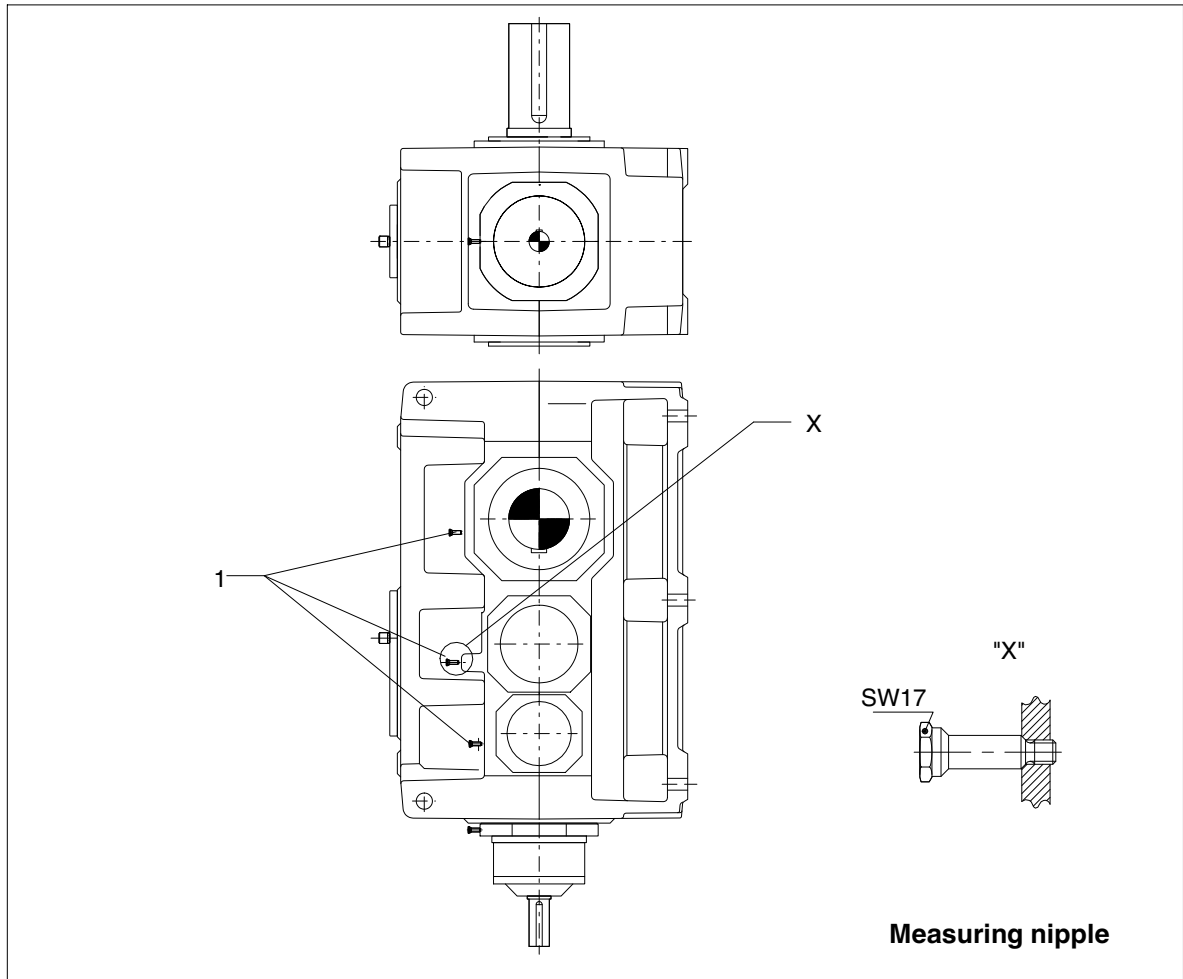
Bearing monitoring by shock-pulse transducer on gear units of type B3.V
